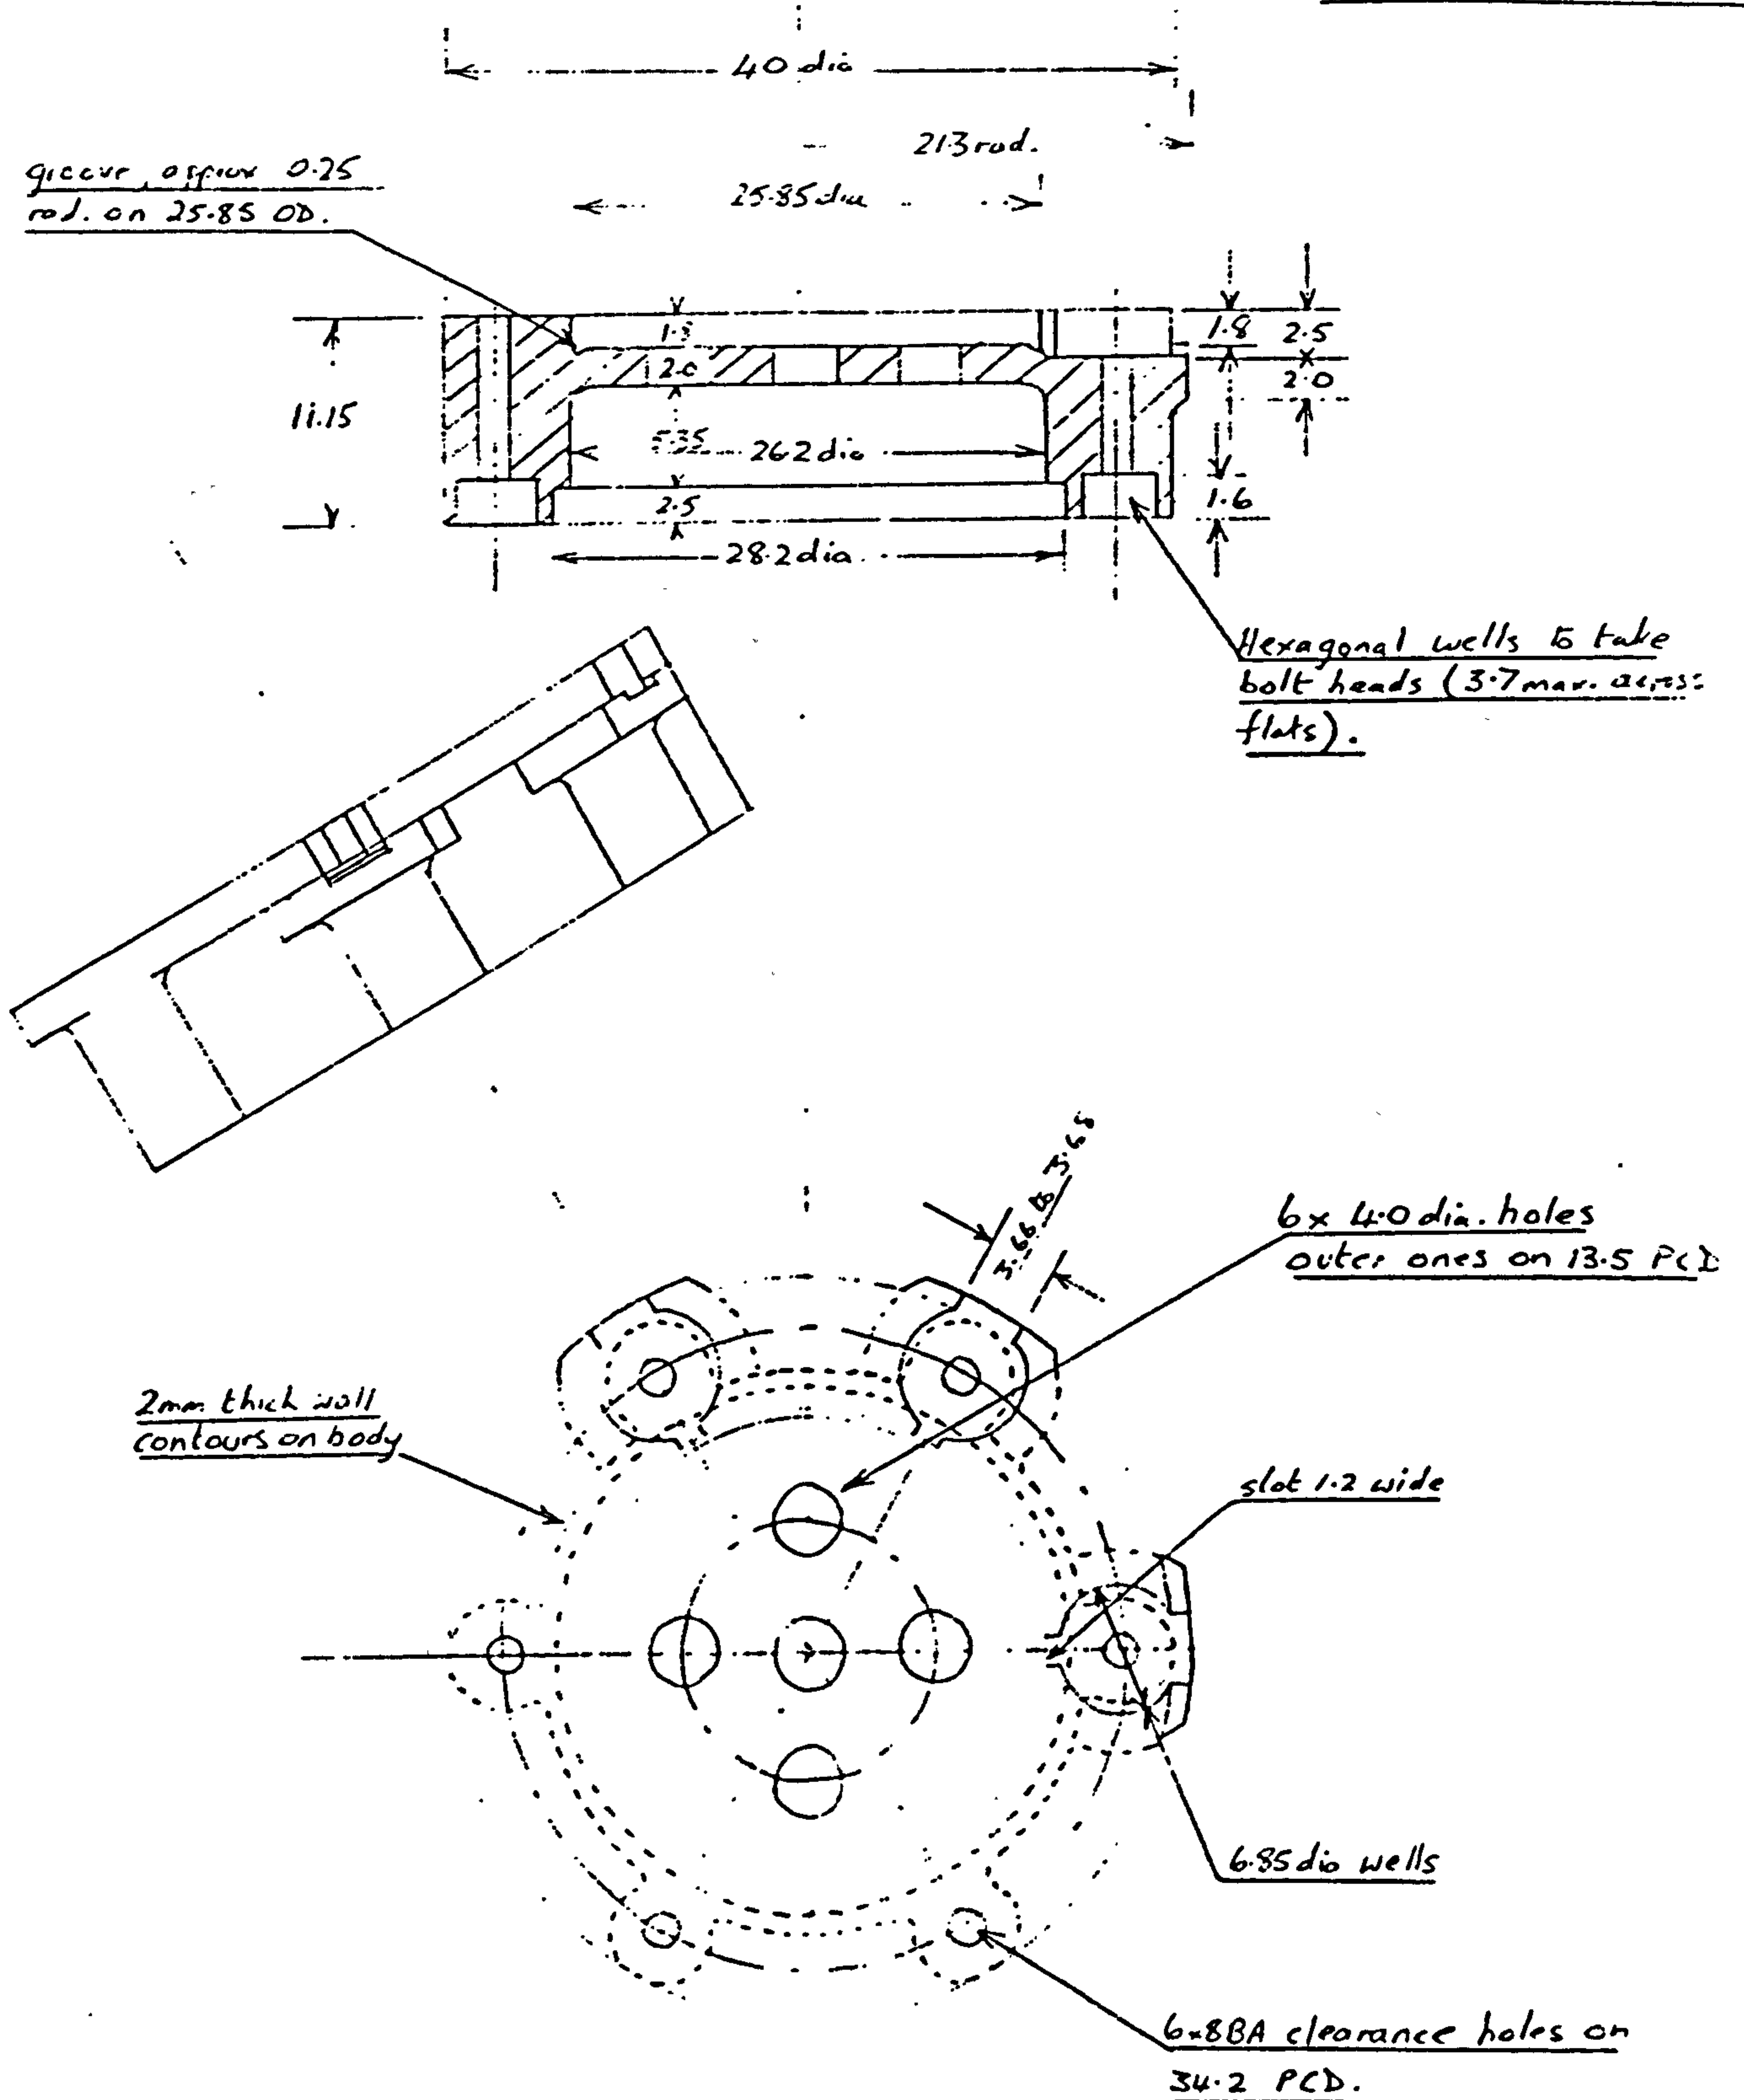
Double size scale drawing of final injection moulding design for CO sensor body-plate.
